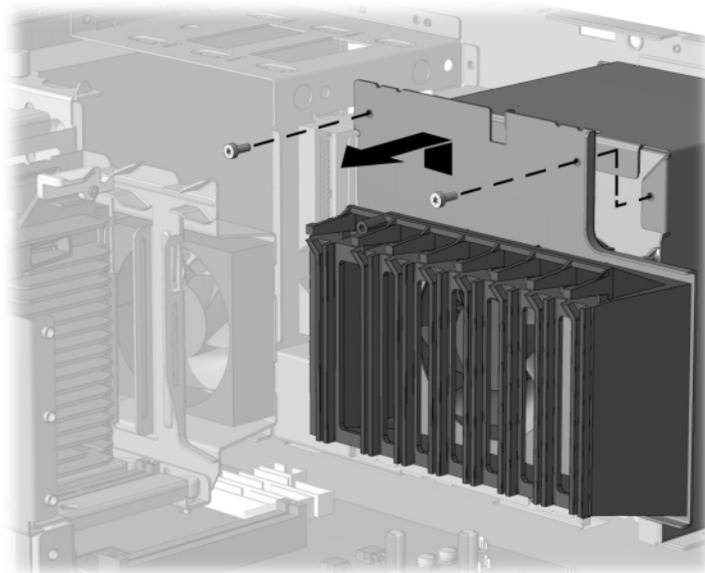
Removing the two screws attaching the card guide to the air plenum
